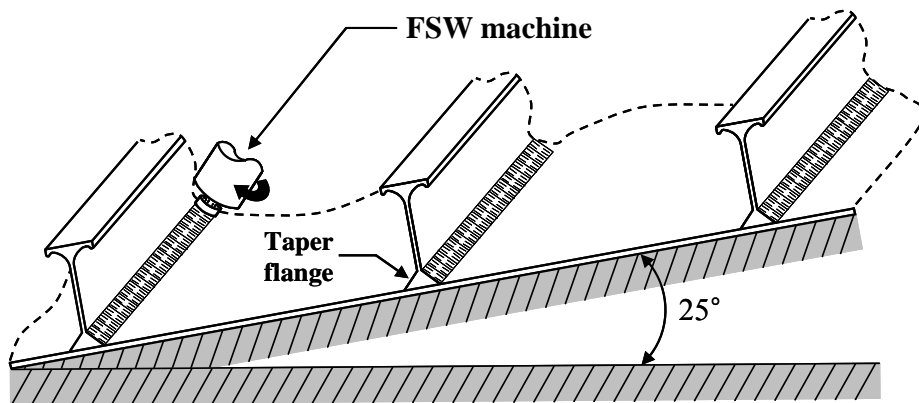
(a) Schematic of FSW for fillet-joining between a continuous plate sheet and extrusions with taper flange (Method A)
